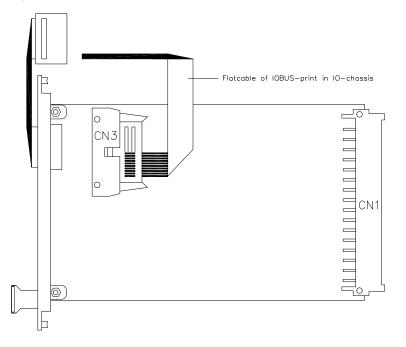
Side view of the IO-0001 module with a flatcable from a redundant IO chassis
